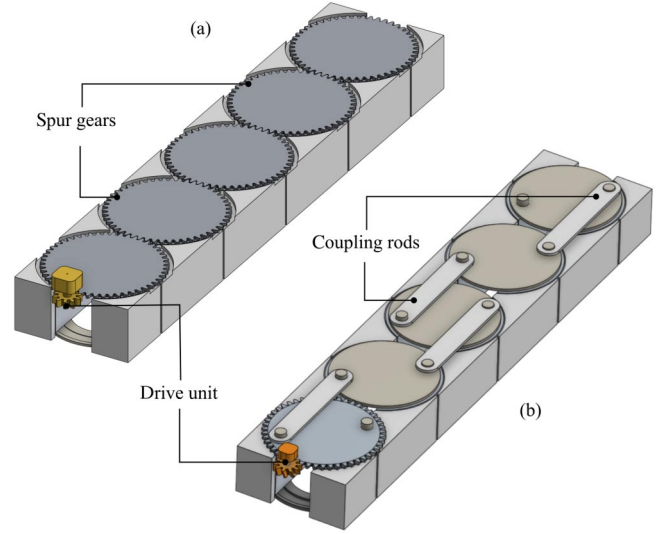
Conceptual designs for the shielding rotation mechanism driven by a single motorized drive unit. (a) Gear-based synchronization using a series of spur gears and (b) alternative linkage synchronization using coupling rods.
